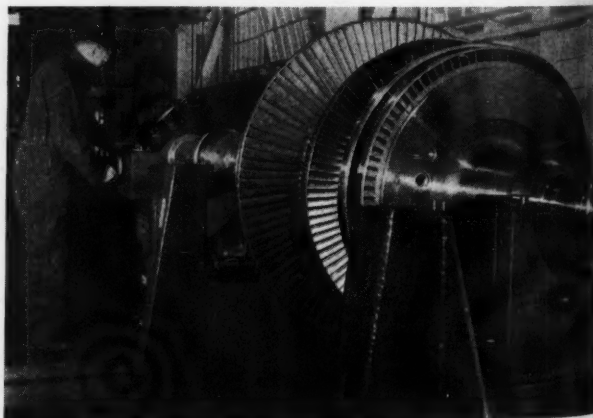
Testing a Spindle for an 8,500 H. P. Steam Turbine for Balance. This Machine Locates the Exact Point of Unbalance
